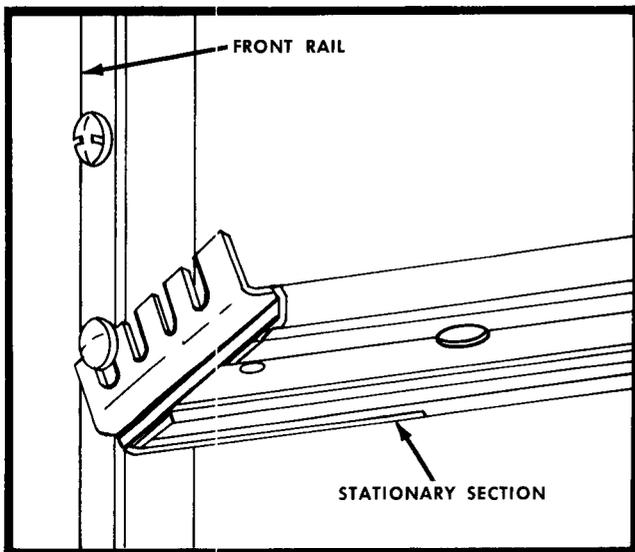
Mounting the slideout track stationary section to the cabinet front rail using threaded holes.
